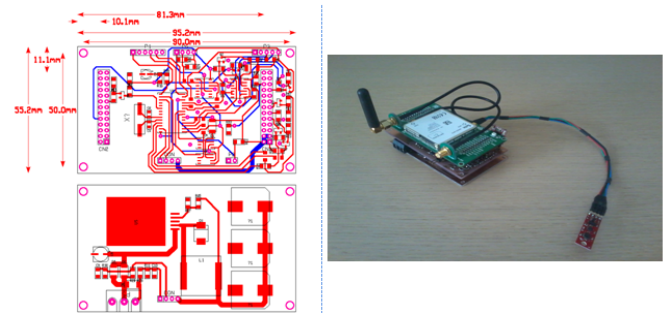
PCB (Printed Circuit Board) and Module with sensor board
